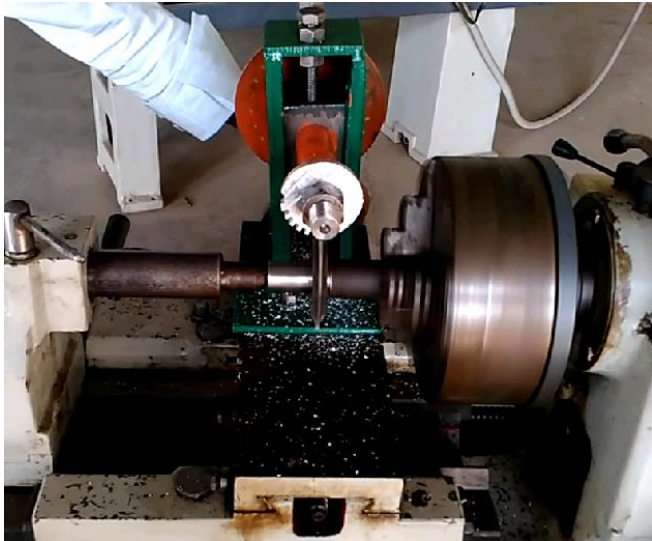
Working Of Gear manufacturing by using conventional lathe machine
